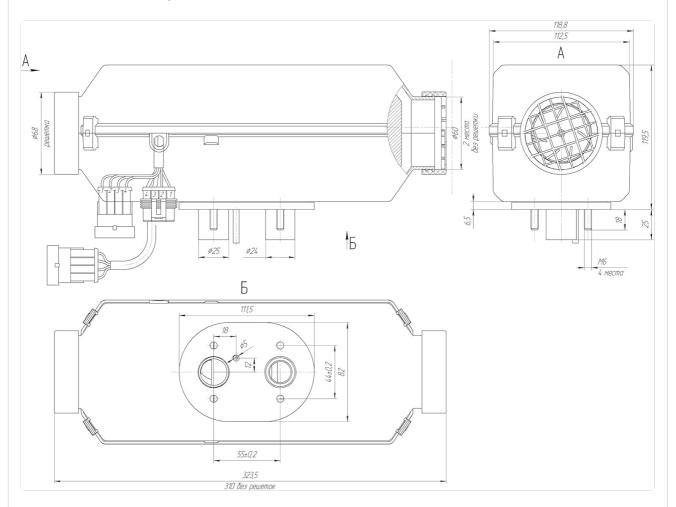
Technical drawing illustrating the dimensions and mounting points of the Planar 2D heater unit. Refer to these measurements for precise installation planning.
